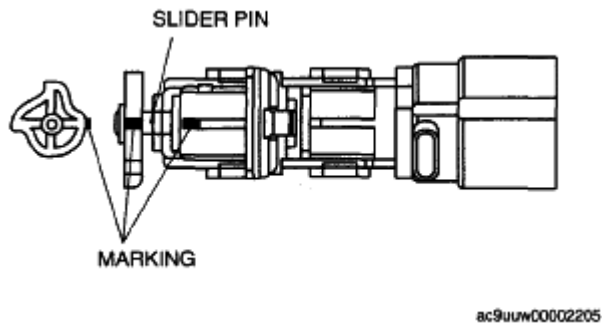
Inspecting Marking On Slider Pin Is Positioned
